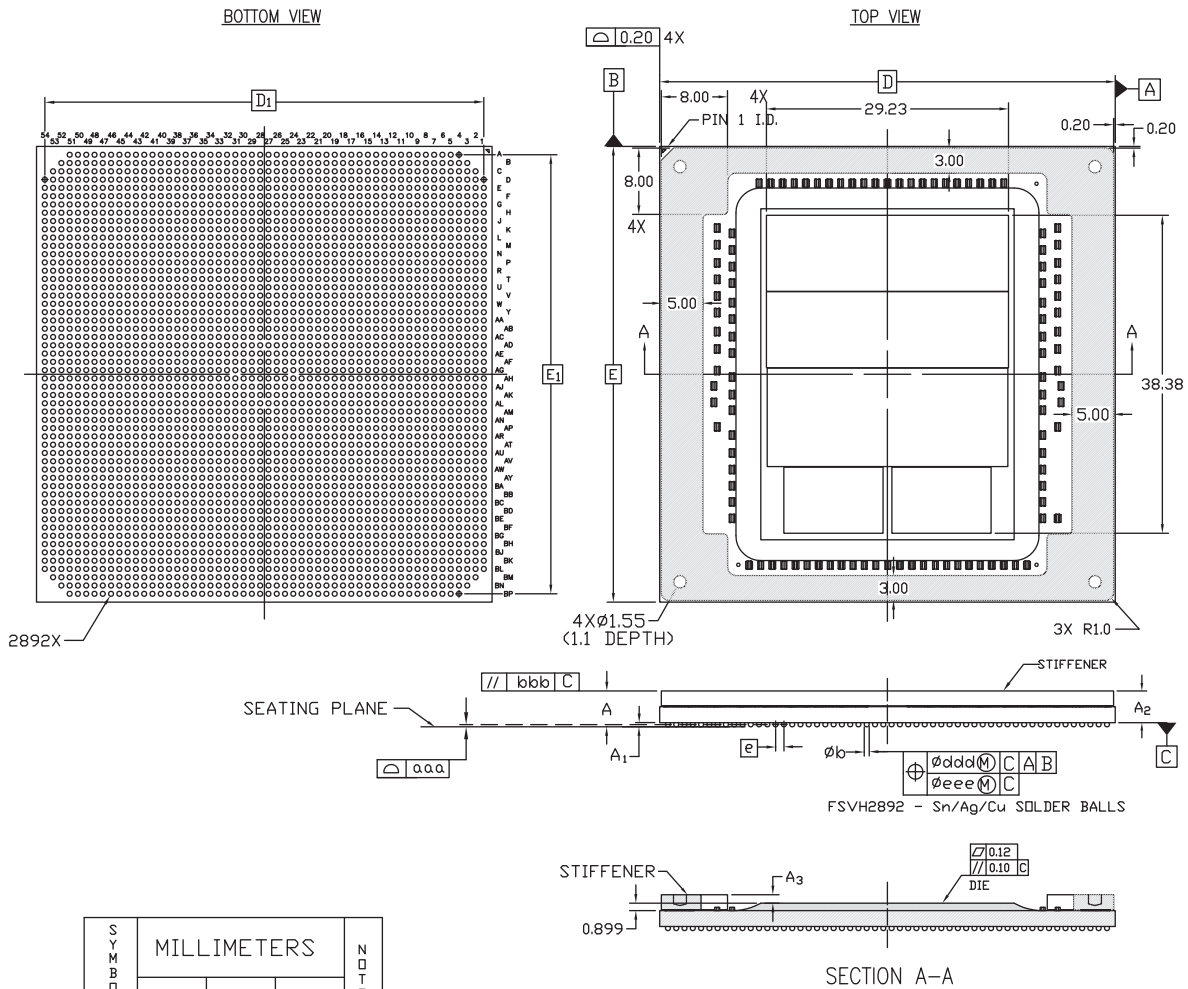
Package Dimensions for FSVH2892 (XCVU37P)
